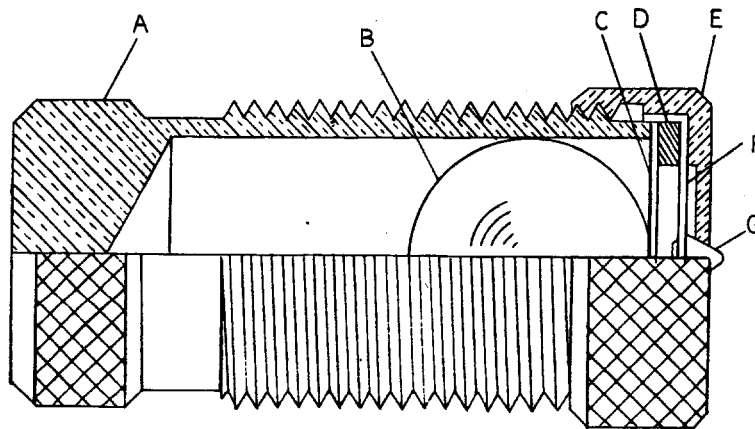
(8027688 and 8023399) Low Gradient Contact Assembly of the CNP11A Relay
